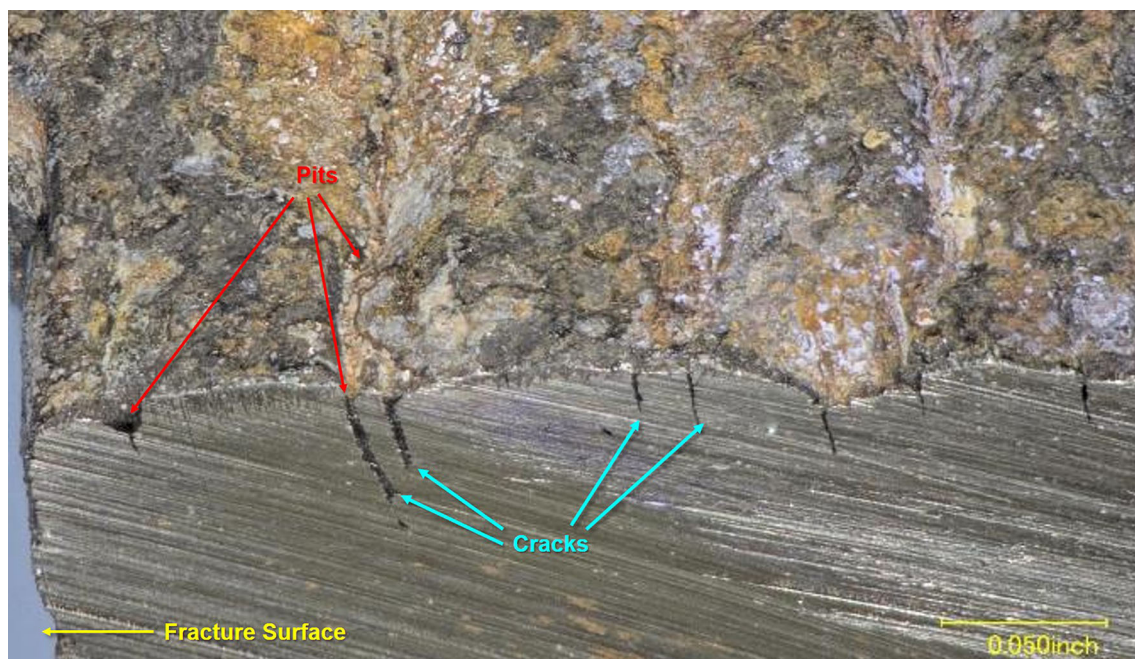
Angled view of a cross section of through-wall fracture surface, showing parallel cracks propagating from pits on the outer pipe surface
